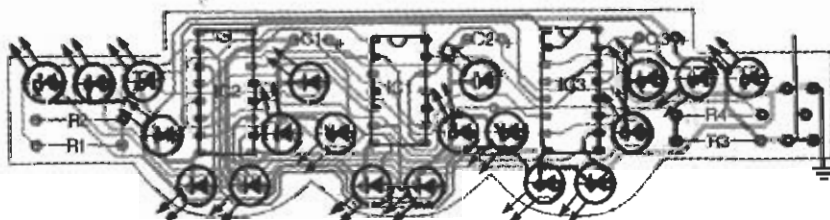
VISIBLE INDUCTOR PARTS PLACEMENT. Mount the LEDs last, so they're not in your way when installing the other components.
